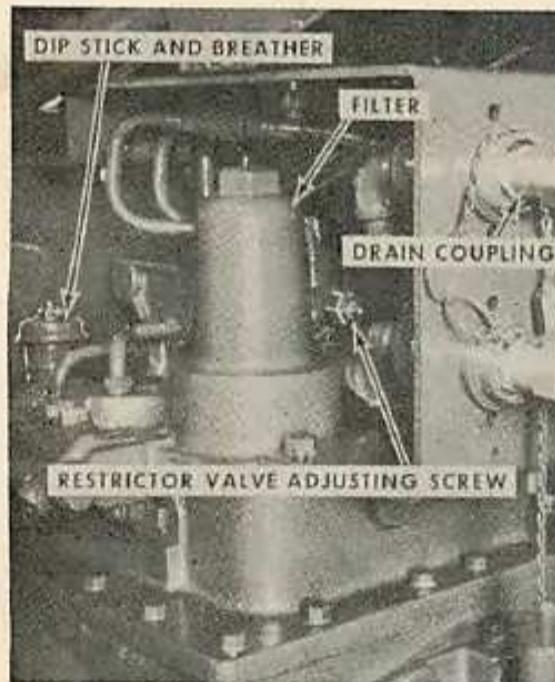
View of left rear corner of depth stop cylinder hydraulic housing (with shroud removed) showing location of hydraulic fluid dipstick, filter, drain coupling and restrictor valve adjusting screw on left control valve unit.
